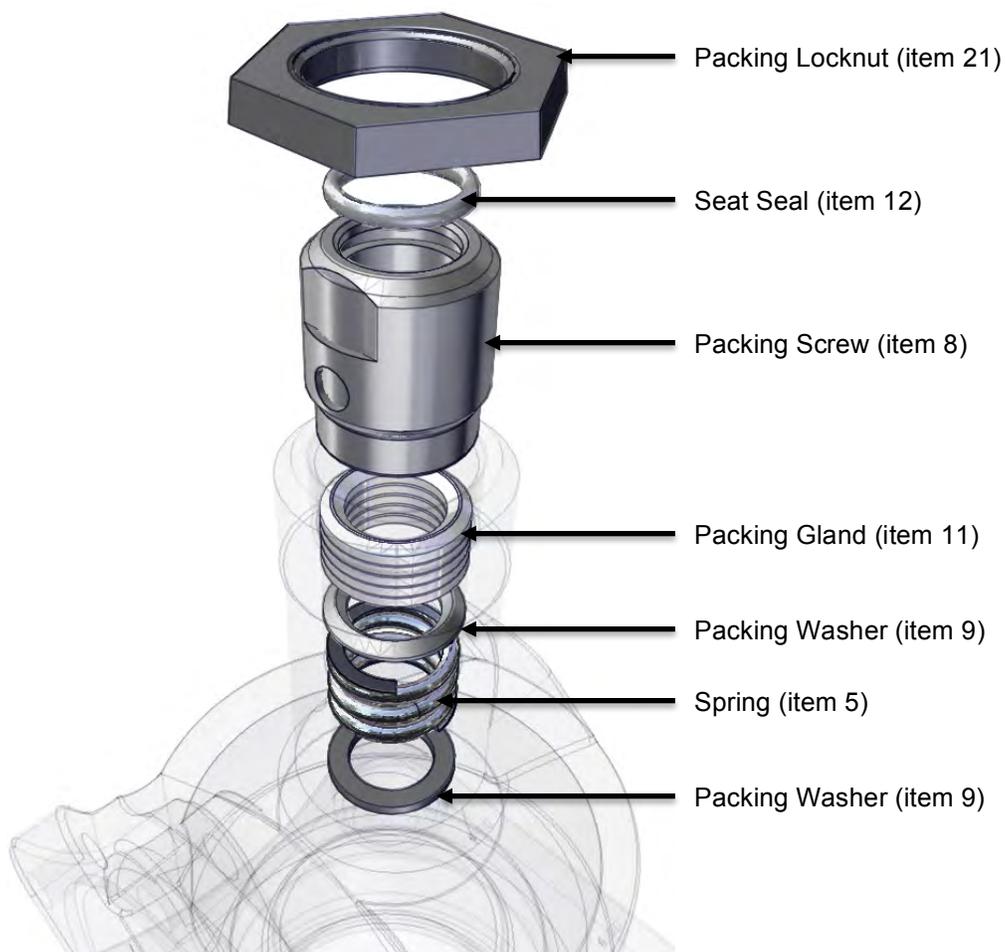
Reassembly Steps 7.2.1 through 7.2.7
